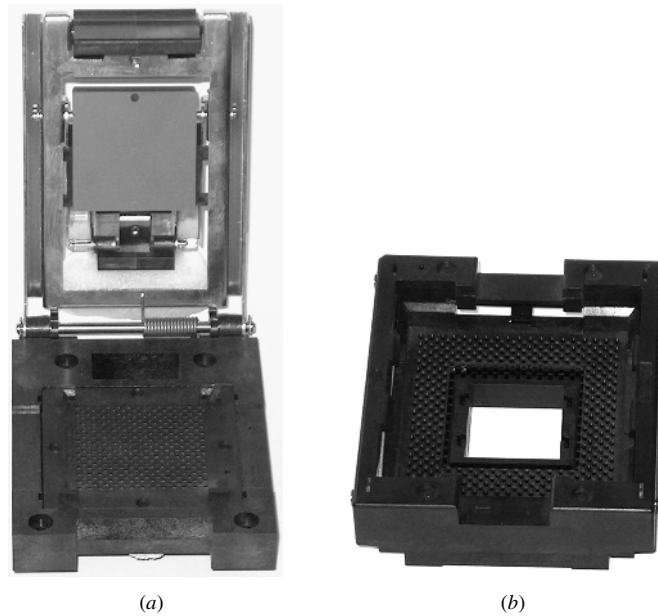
BGA sockets: (a) clamshell structure; (b) open-top structure.
